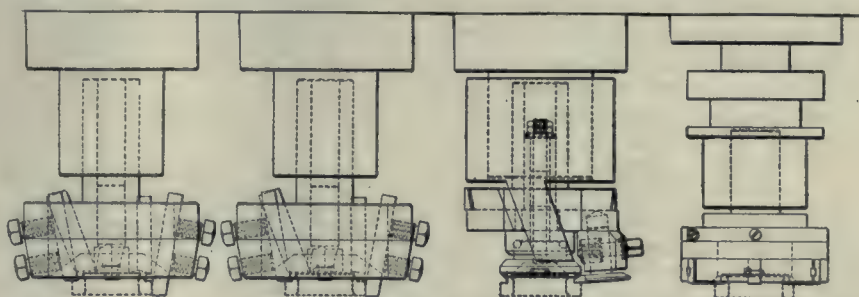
TOOL LAYOUT FOR MACHINING SHRAPNEL SOCKETS—SECOND OPERATION.
